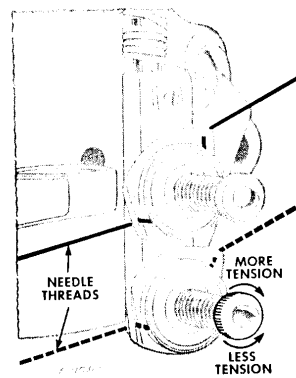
Regulating Tension on Needle Threads (View on Top of Machine)
